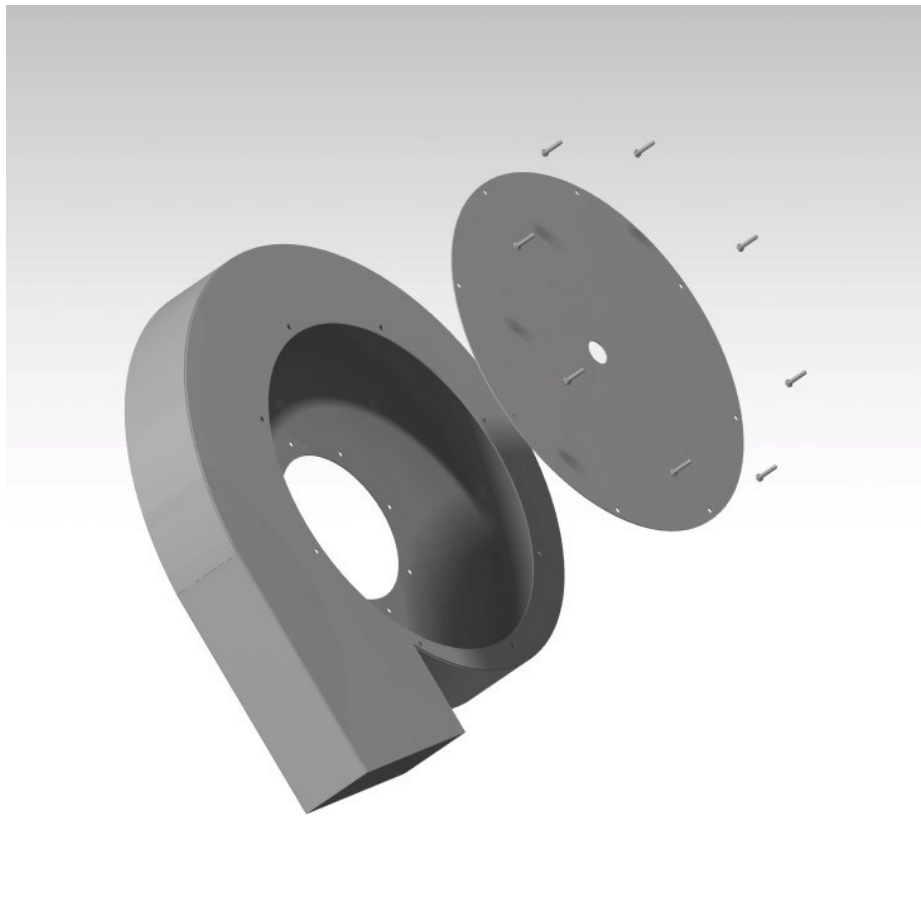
Impeller's casing. The plate and the flanges are welded, except the top plate that is assembled using bolts, for the impeller to be assembled inside the casing.
